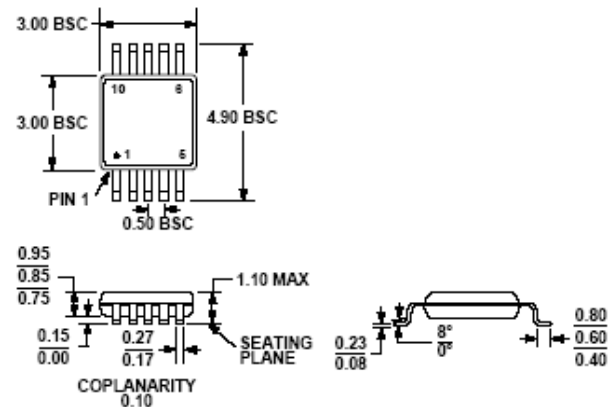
10-Lead Mini Small Outline Package [MSOP]
